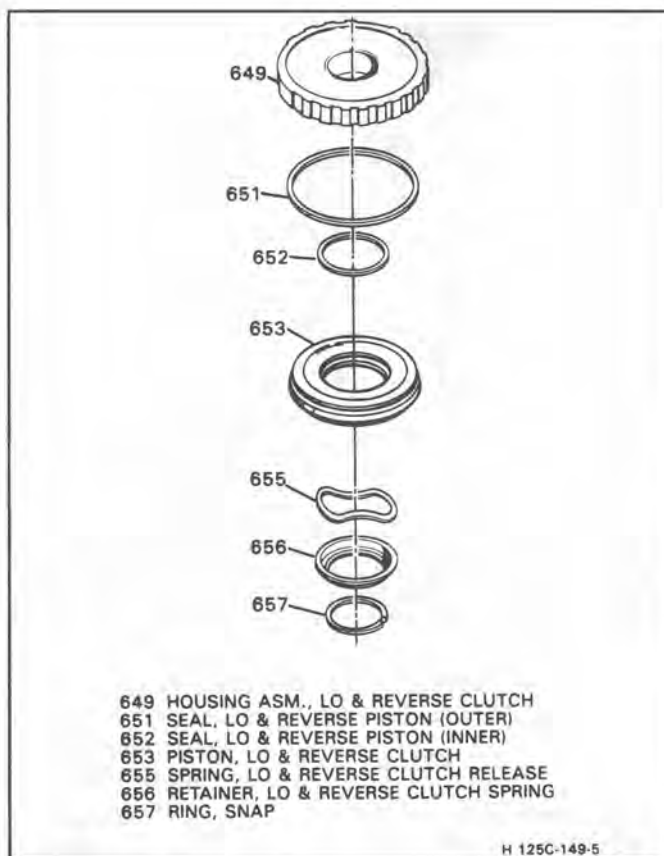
Lo &amp; Reverse Clutch Housing Assembly
